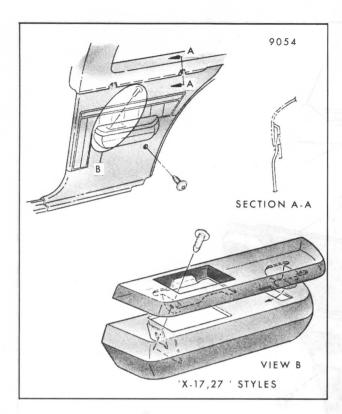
Quarter Trim and Armrest Attachment - "X-17,27" Styles
